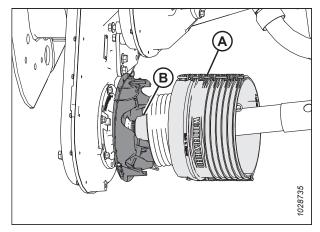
Driveline Installed on Float Module Gearbox Shaft
